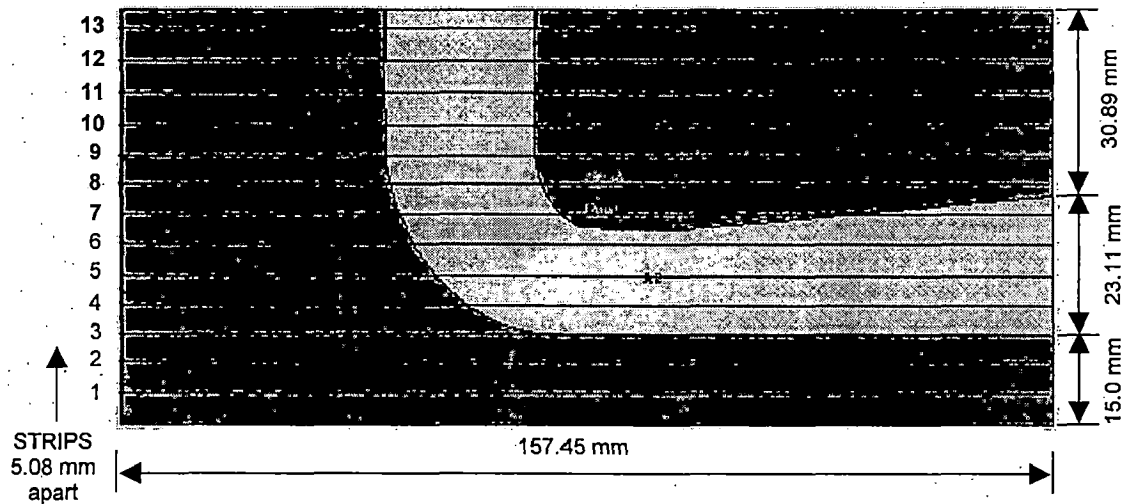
TRANSVERSE SECTION OF THE MODEL AT POINT 12 (X=53.12 mm) SHOWING STRIPS
